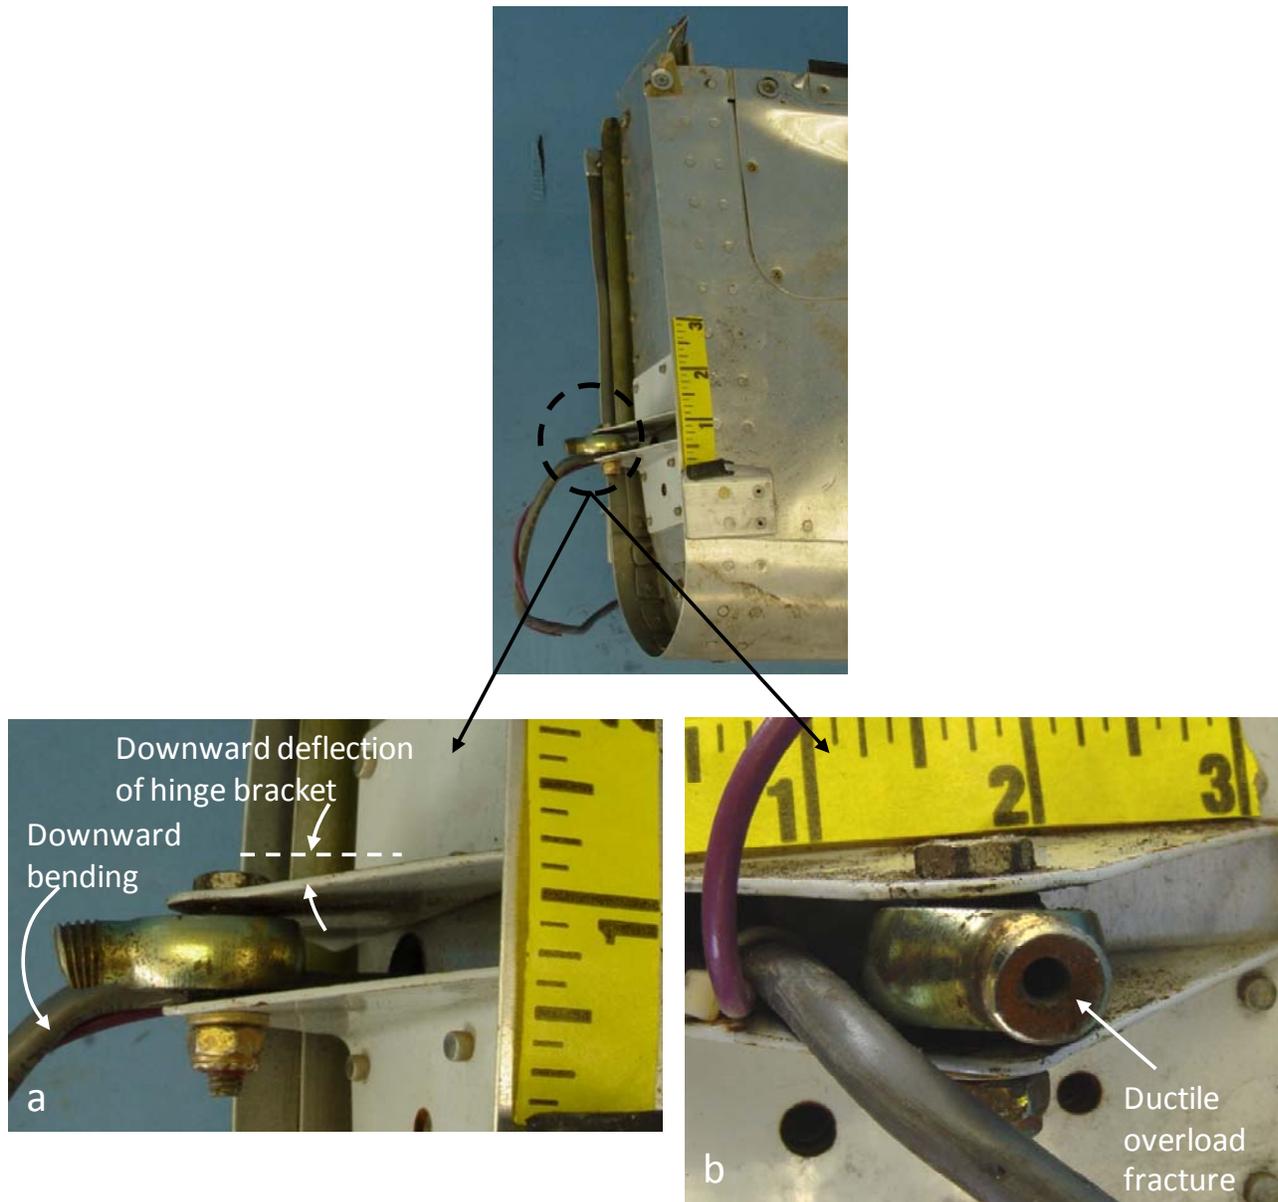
a) macrograph showing bent rudder hinge brackets and bent threads on a rod end. b) macrograph showing ductile overload fracture surface of the threaded section of the rod end.
